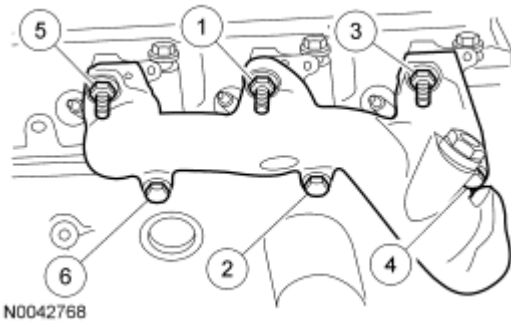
Identifying Tightening Sequence Of Exhaust Manifold Bolts
